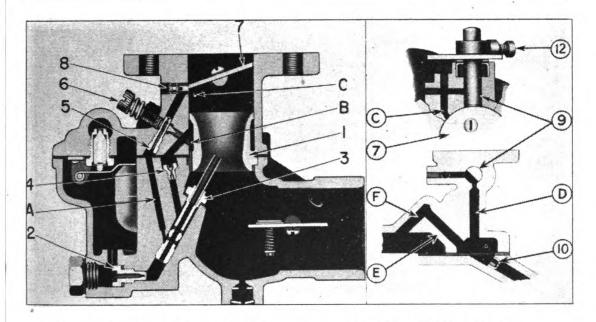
Sectional View of Zenith Carburetor Used on "SI" Tractor
